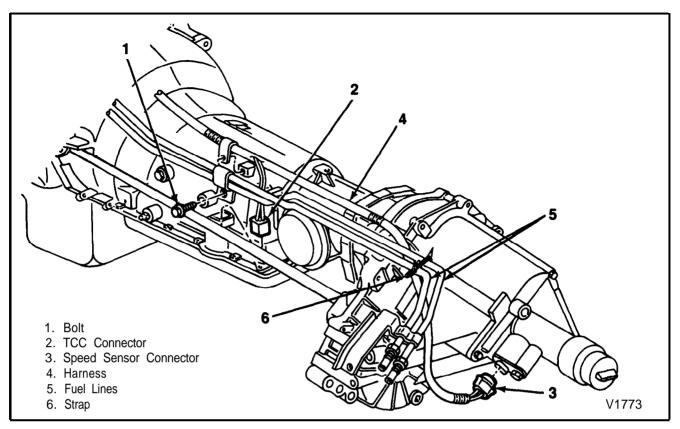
Engine Wiring at Transmission-4.3L Turbo Engine
